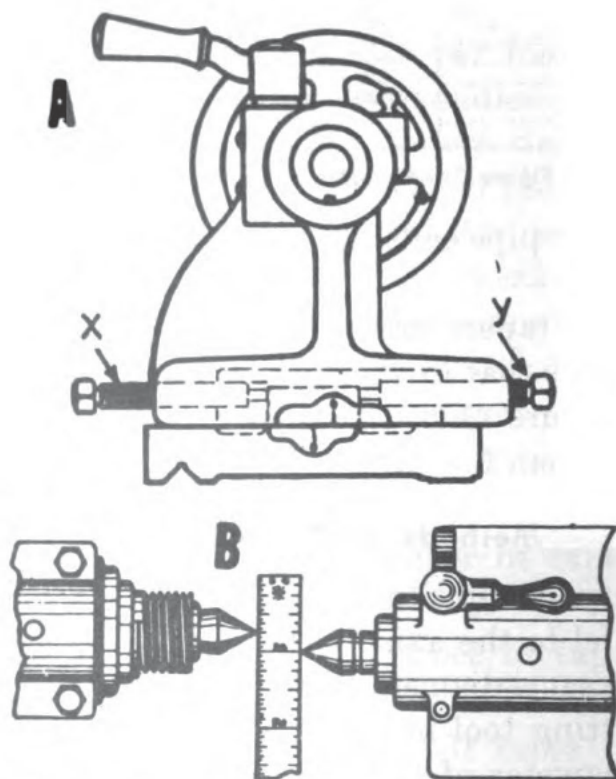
Setting and measuring tailstock set-over for taper turning.
